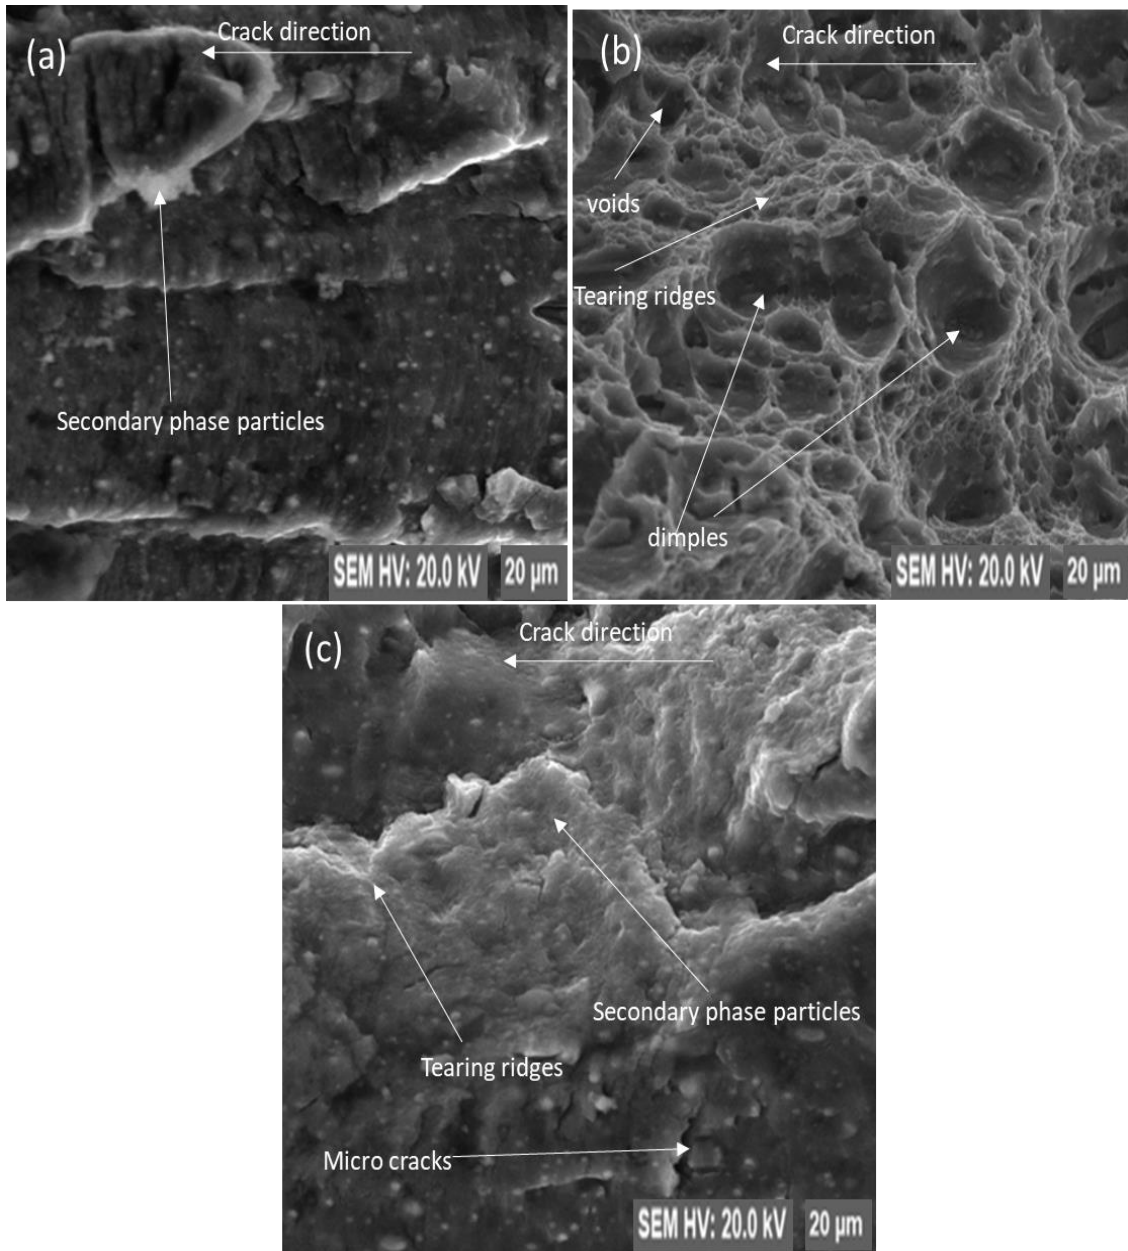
Fatigue crack propagation morphology of Al alloy 7075-O, (a) CPF-countersunk rivet hole, (b) CPS-perpendicular rivet hole, (c) CPF-perpendicular rivet hole.
